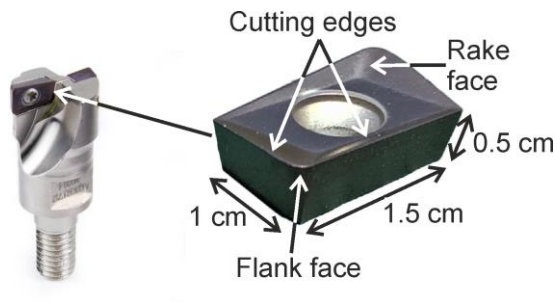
A Widia® mill insert dimensions and its position in the milling holder
